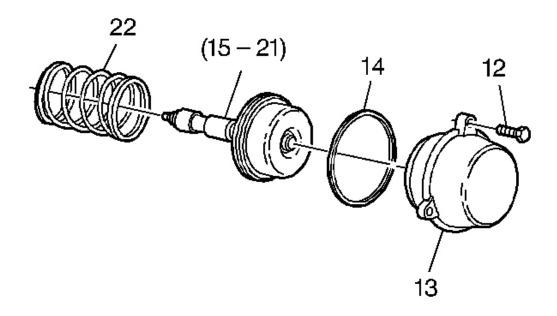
View Of Servo Assembly Courtesy of GENERAL MOTORS CORP.
